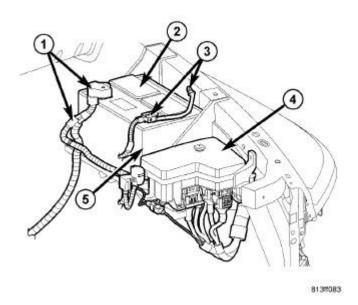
Battery Cables Courtesy of CHRYSLER GROUP, LLC
